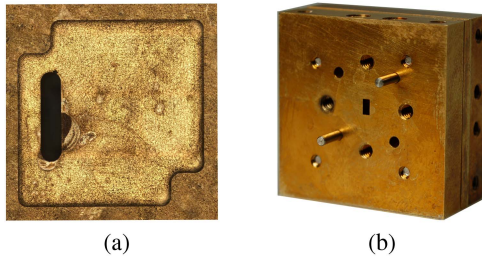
Fabricated W-band prototype. (a) Close-up view of the internal cavity and one of the resonating iris-slots, and (b) the assembled filter unit.
